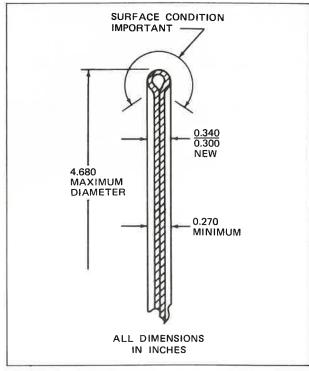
SEAL RING DIMENSIONAL LIMITS.
